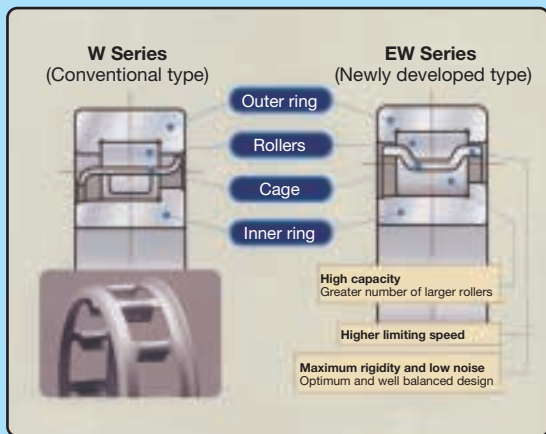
Comparison between W and EW Series cylindrical roller bearing
